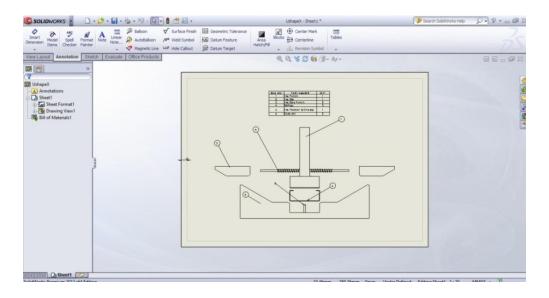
5) Assembly of the Punch, die, Striper and U-shape
